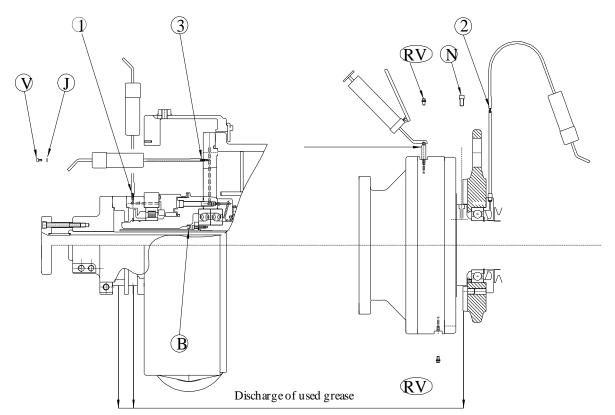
Lubrication Point for the Front Pillow Block and Scroll Thrust Bearing
